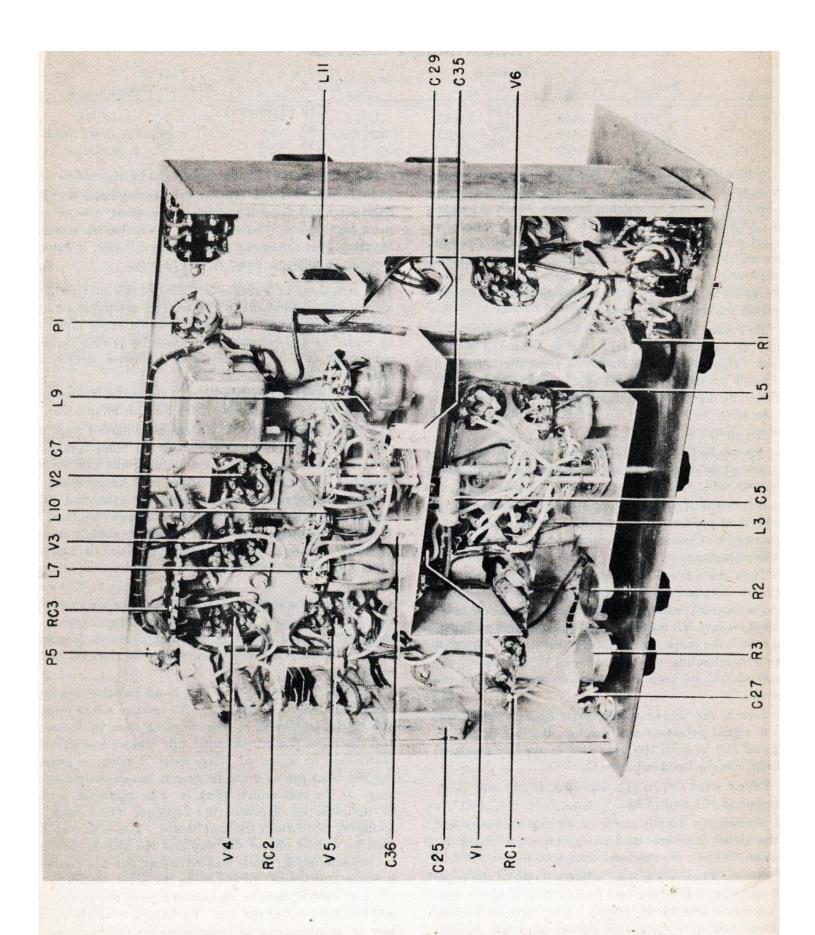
Radio Receiver 128-AY, Bottom Right Oblique View of Chassis.
